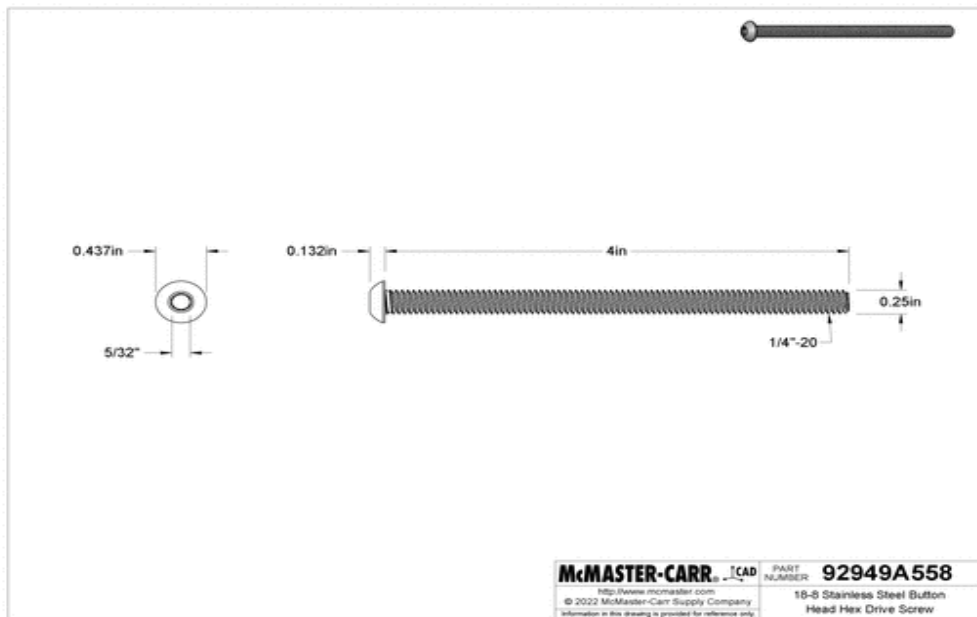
McMaster Carr 4" Stainless Steel Bolt Drawing
